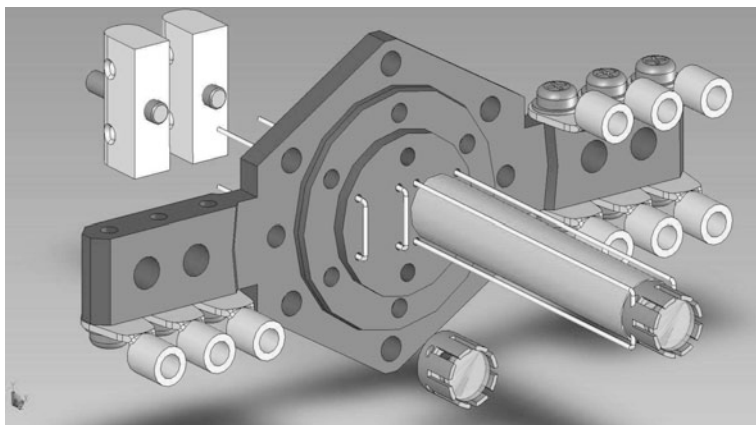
Scheme of the internal sample holder structure. The nylon threads make the positioning of the sample possible without using glues or screws. Reprinted with permission [2]
